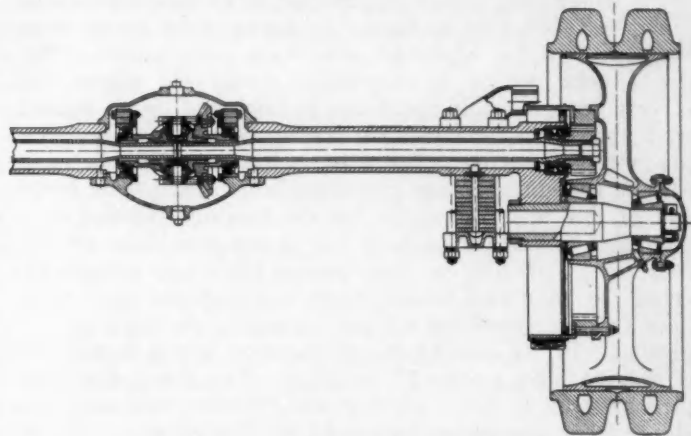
SECTIONAL DRAWING OF THE TYPE-L AXLE
